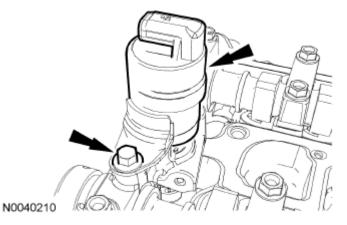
Locating Variable Camshaft Timing Solenoid And Mounting Bolt Courtesy of FORD MOTOR CO.
